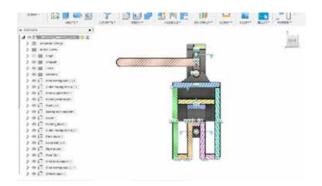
Section view to analyse the inside spacing of the assembled machine.
